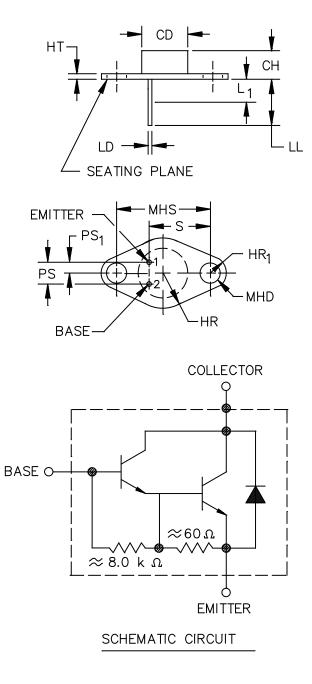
Physical dimensions and schematic (TO-213AA, formerly TO-66).
